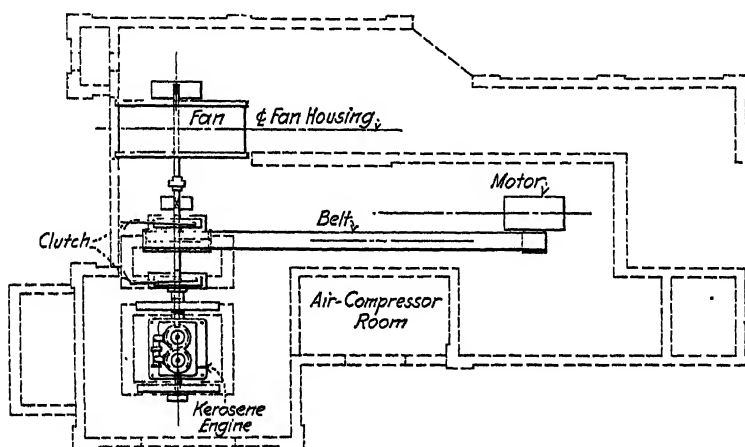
AUXILIARY DRIVE FOR MINE FAN.
